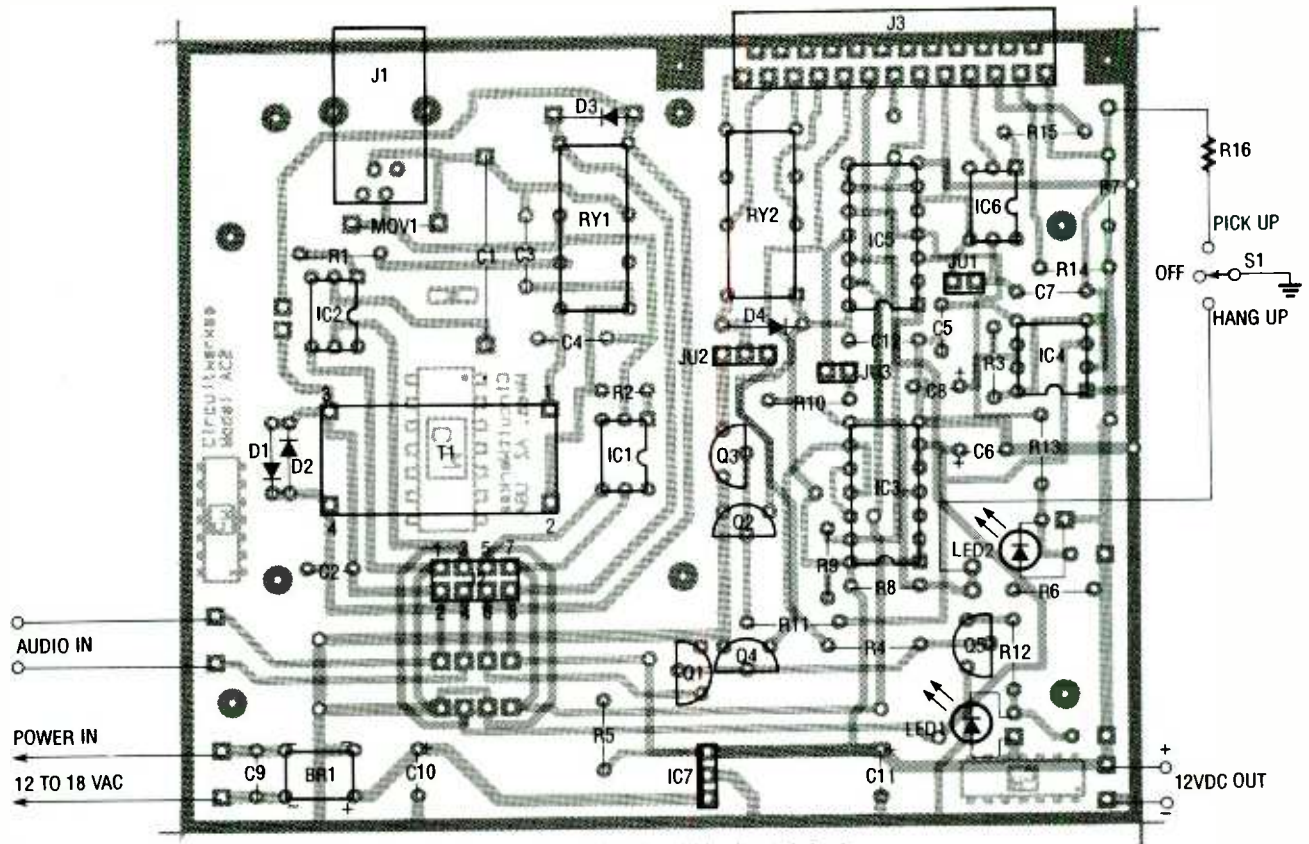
PARTS-PLACEMENT DIAGRAM. Voltage-regulator IC7 should be heatsinked. Note that the MPC-2 section must be built exactly as described to be type-approved.
